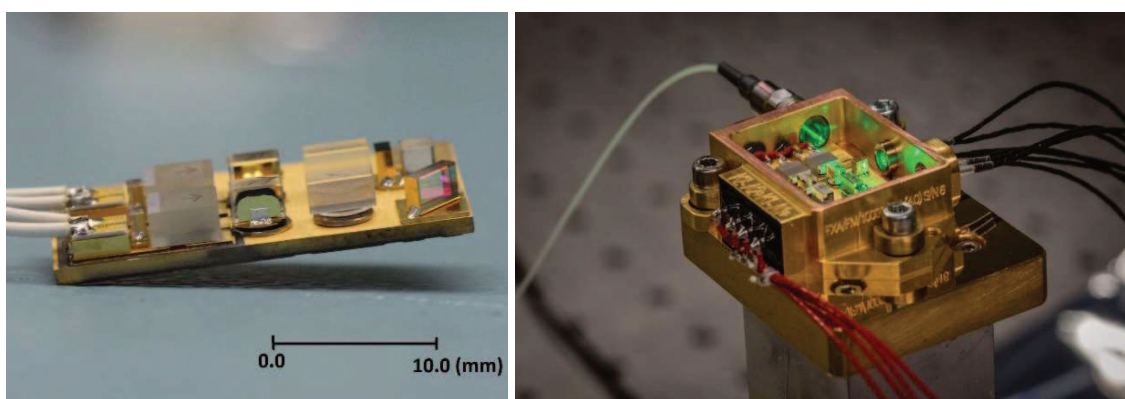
Finished miniaturized FM DPSSL-laser assembled by solderjet technology means and ready to be delivered to ESA.
